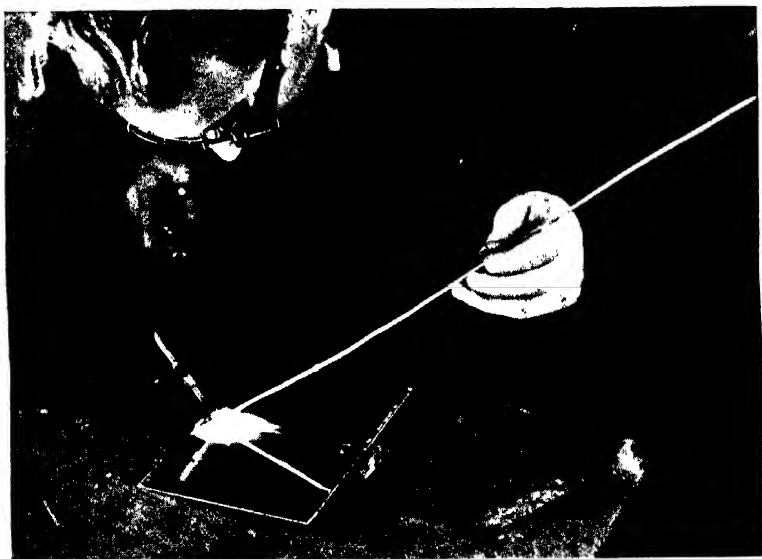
DOWNHAND WELDING SHEET ALUMINIUM BY THE LEFTWARD METHOD
